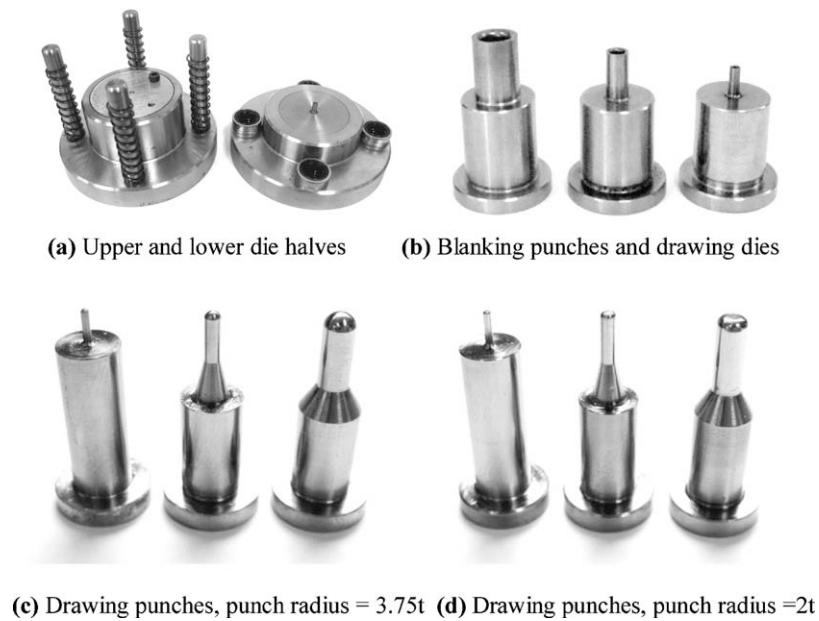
Blanking and deep drawing compound tooling set. (a) Upper and lower die halves; (b) blanking punches and drawing dies; (c) drawing punches, punch radius = $3.75t$; and (d) drawing punches, punch radius = $2t$.
